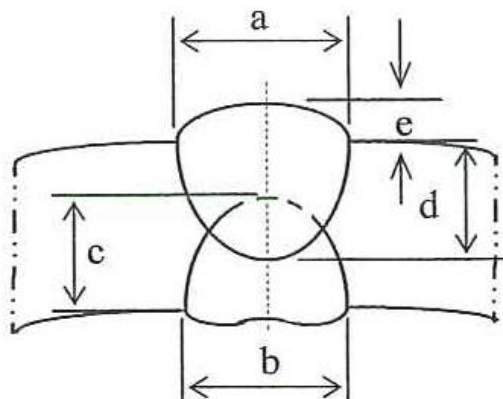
Weld bead shape as per the welding data sheet
